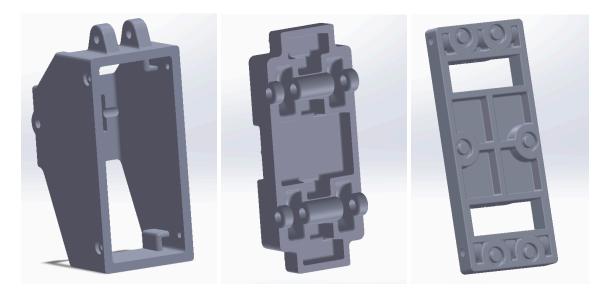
Injection molded shell, slider and front plate having features for uniform thickness
